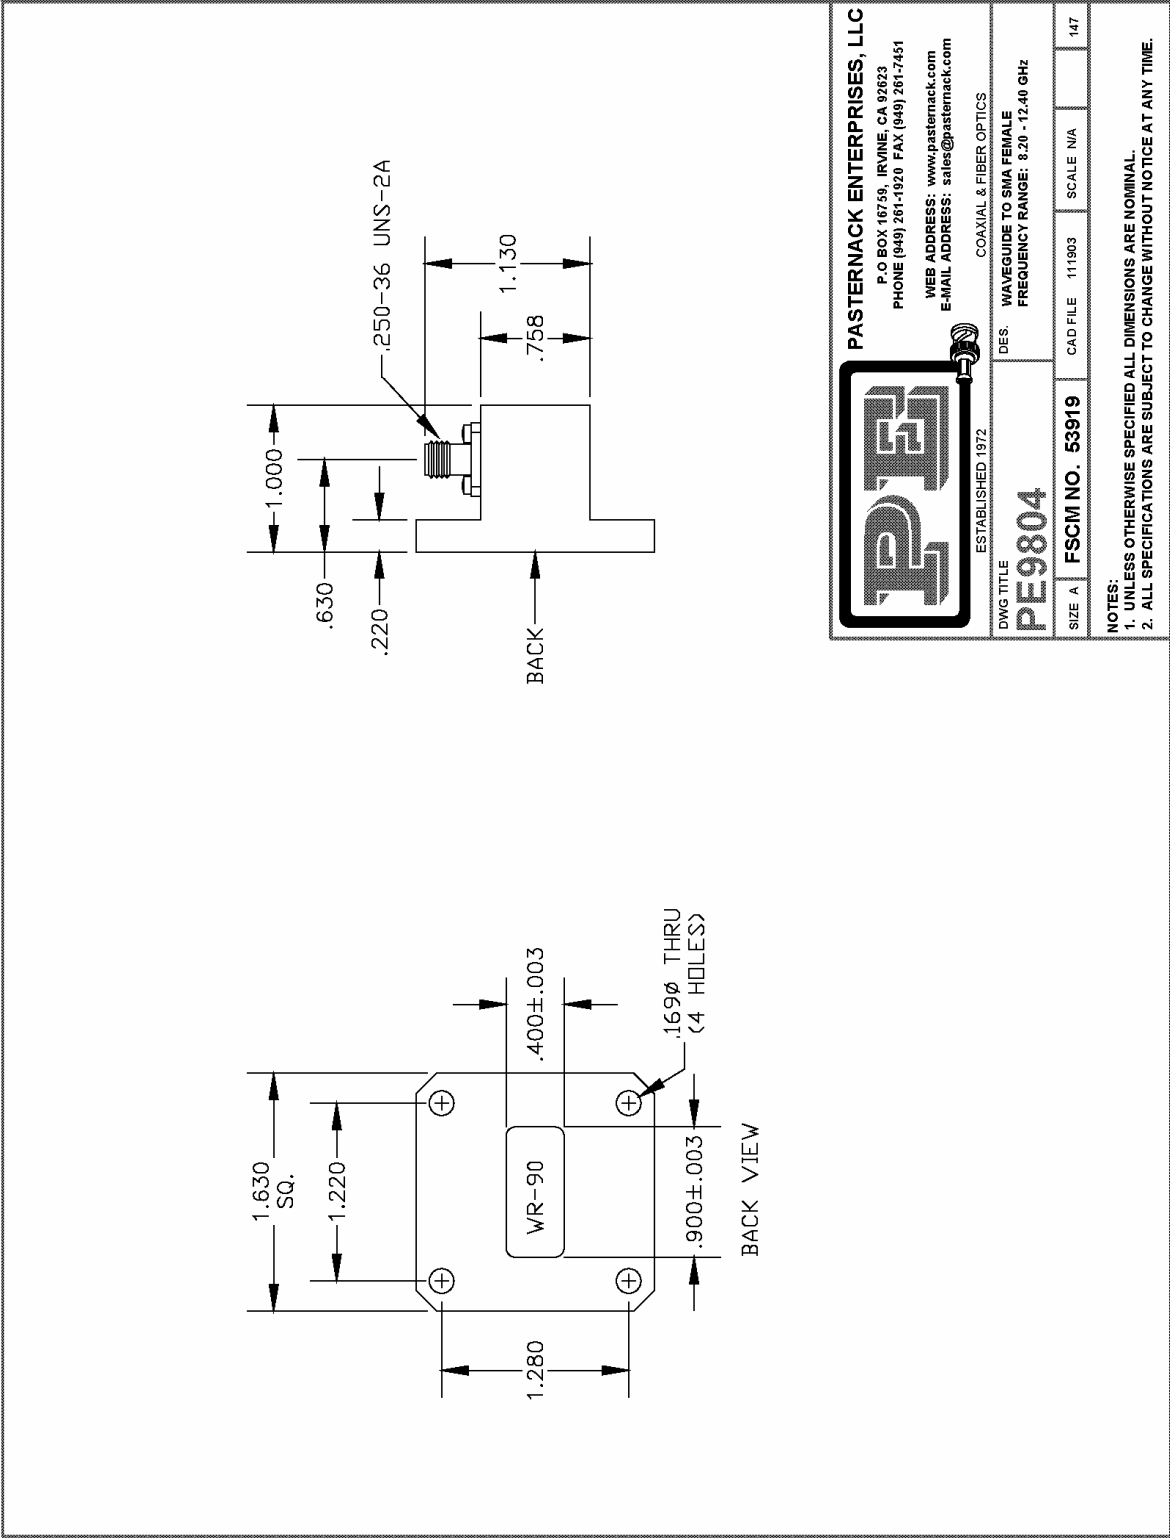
Pasternack Waveguide to Coaxial Adapter Outline Drawing.
